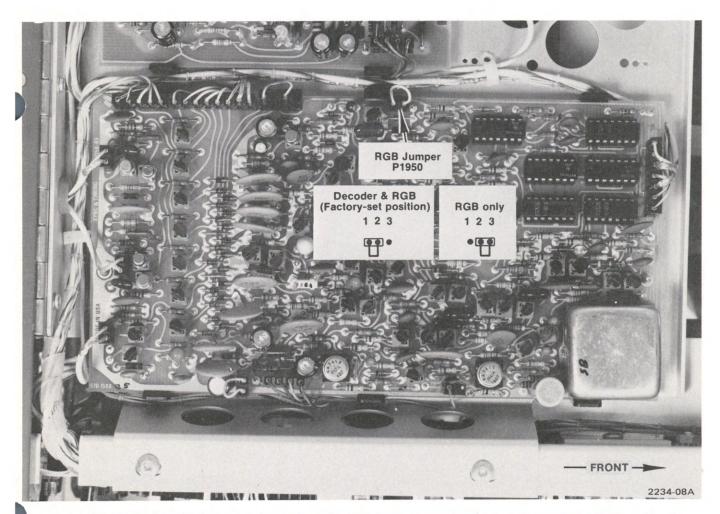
Partial Sync & Timing board showing location of the RGB jumper connector. This board is mounted on the Sync chassis located on the top side of the instrument.
